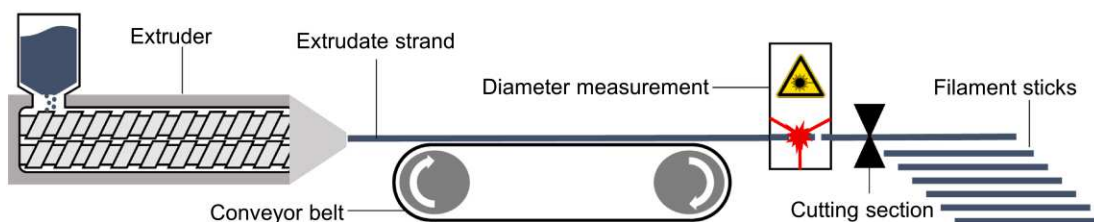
Schematic illustration of filament stick production consisting of the extruder, conveyor belt, laser measurement device and cutting section.
